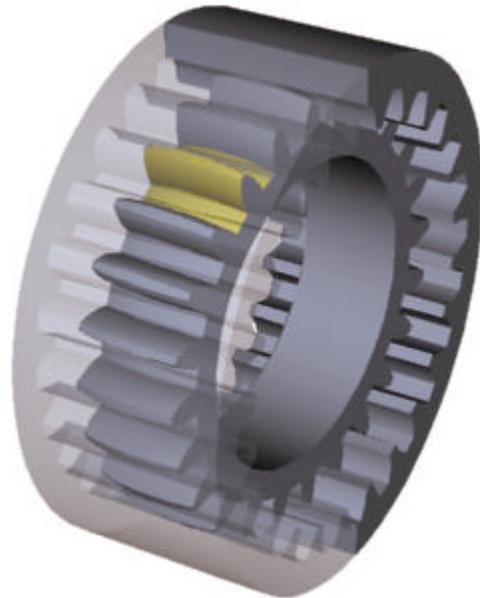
Optimized gear mesh using the Advanced Gear Design method
